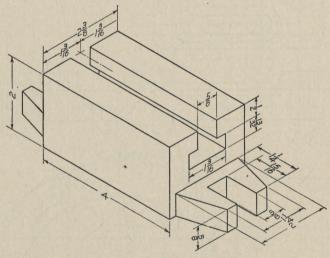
Dimensioning a pictorial drawing (anchor block).
